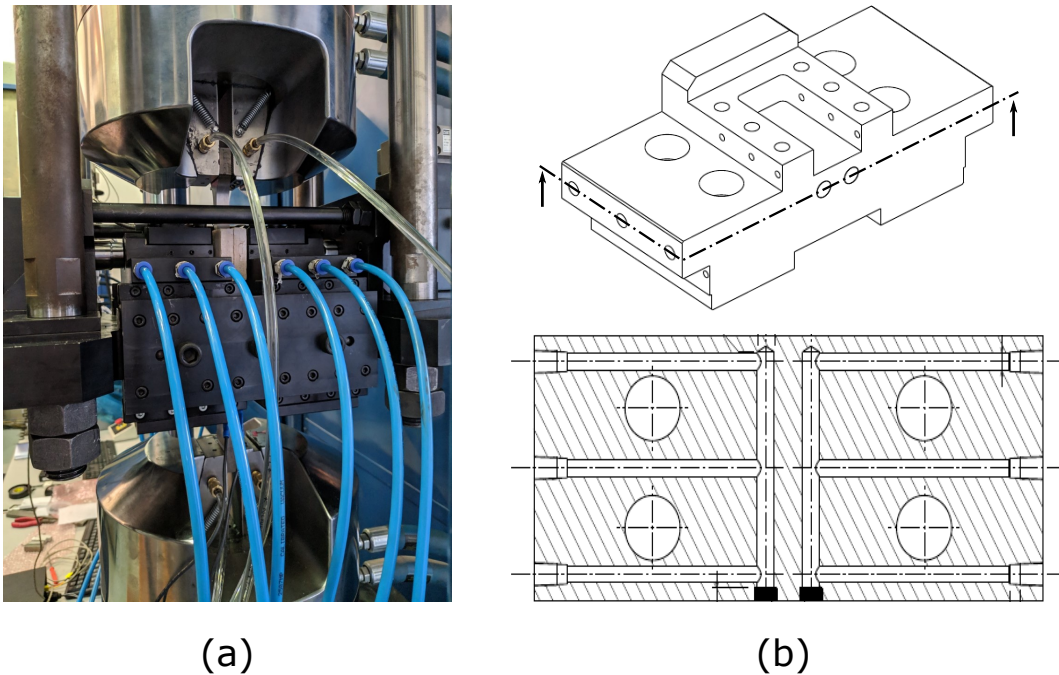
Cooling system of the fretting rig: (a) Photo and (b) Isometric and cut view of the pad holder.
